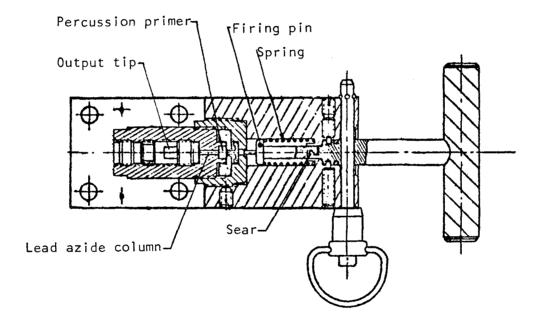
Cross section of AH-1G arming/firing mechanism.
